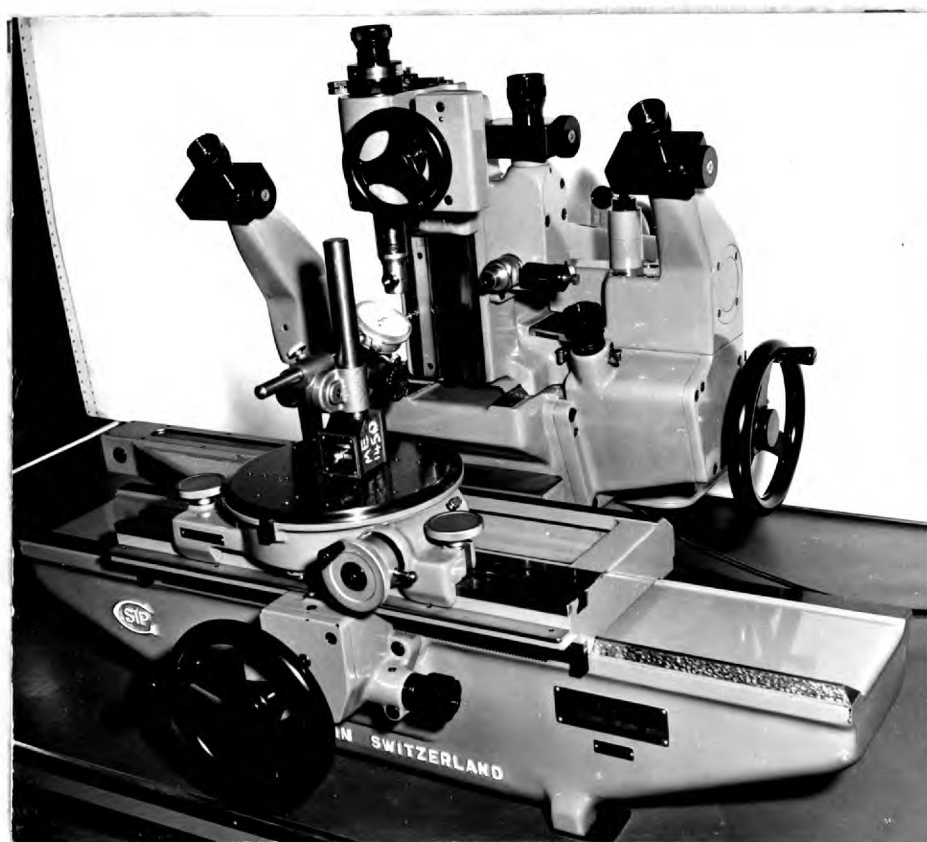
UNIVERSAL MEASURING MACHINE (MU-214-B)
